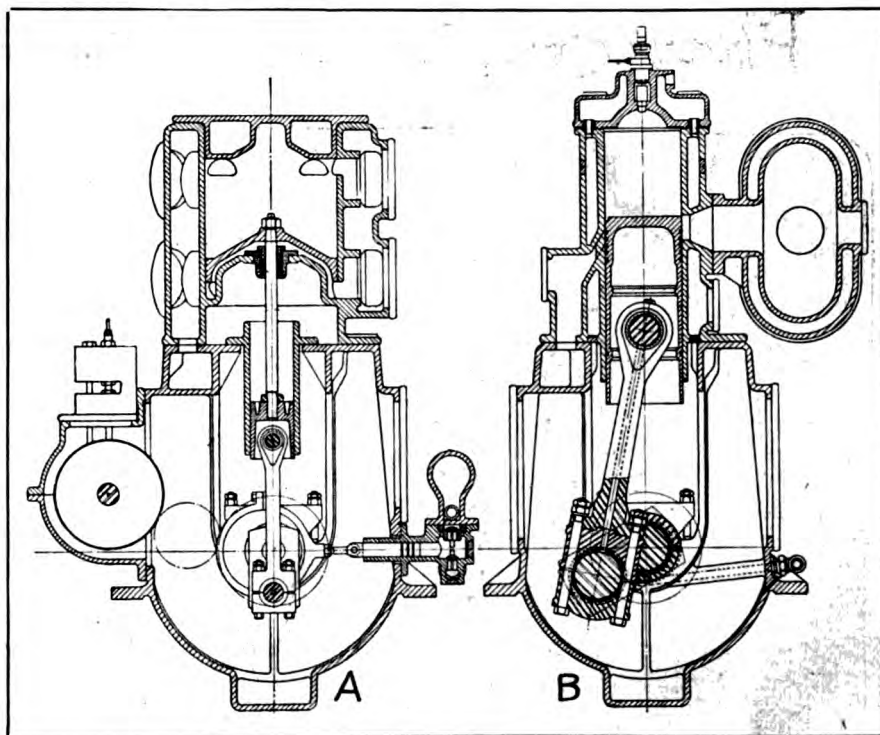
(A)—SECTION THROUGH SCAVENGING PUMP CHAMBER. (B)—SECTION THROUGH WORKING CYLINDER
